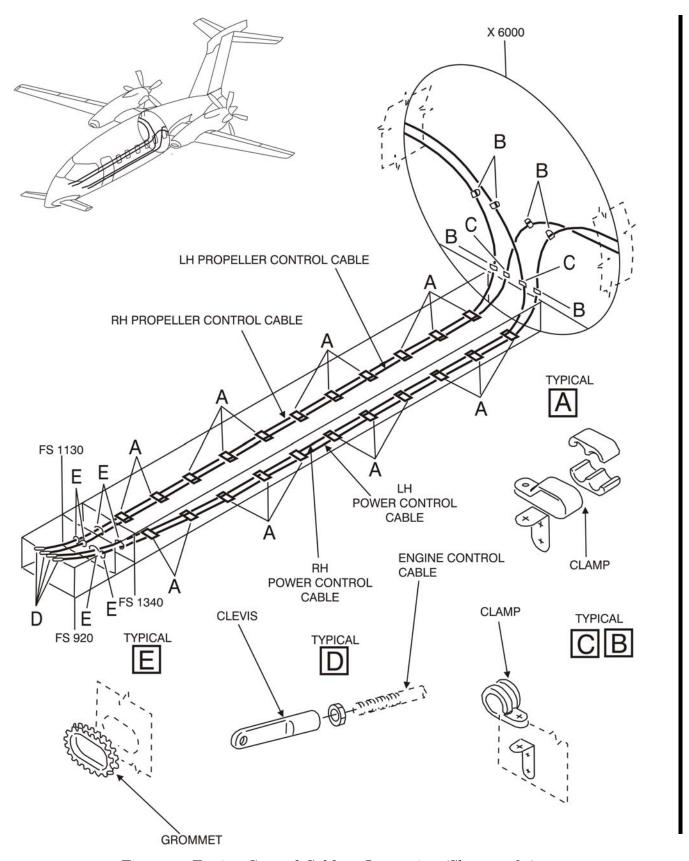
Engine Control Cables - Inspection (Sheet 2 of 5)
